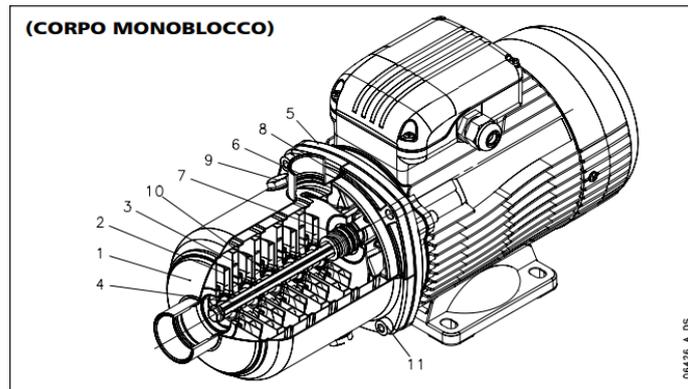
Parts of the multistage horizontal centrifugal electric pump
